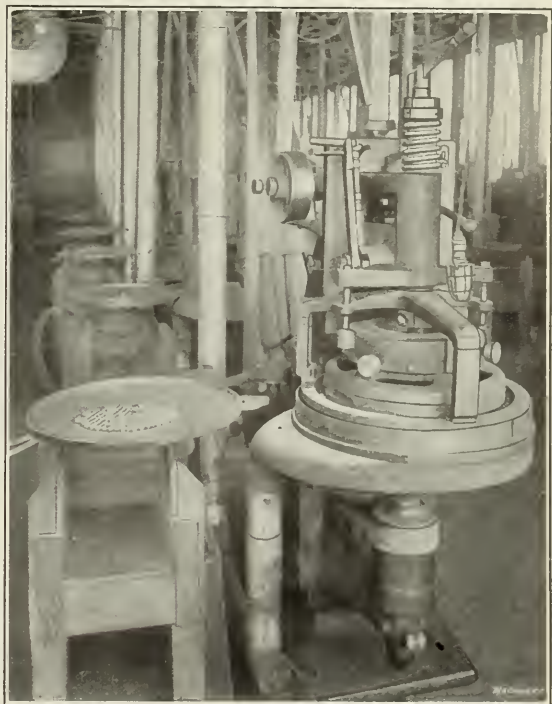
Front View of Grinding Machine, showing Grinding Wheel raised to Operating Position and Tray of Ground Balls just removed from Machine; Balls seen in Ring are not in Grinding Position
